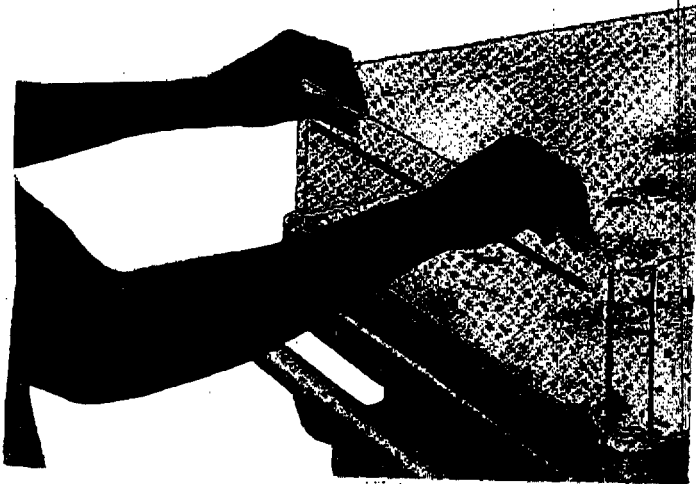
CHECKING THE BASSINET FRONT PANEL
